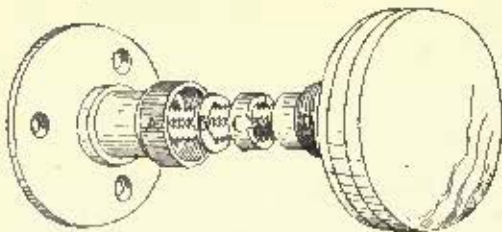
Screwless Fastening Knob. J. Bardsley.
